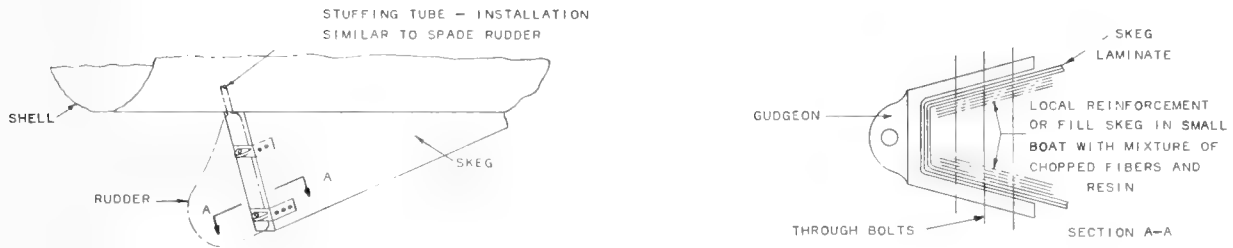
Rudder Attachment for Large Cruising Sailboat
